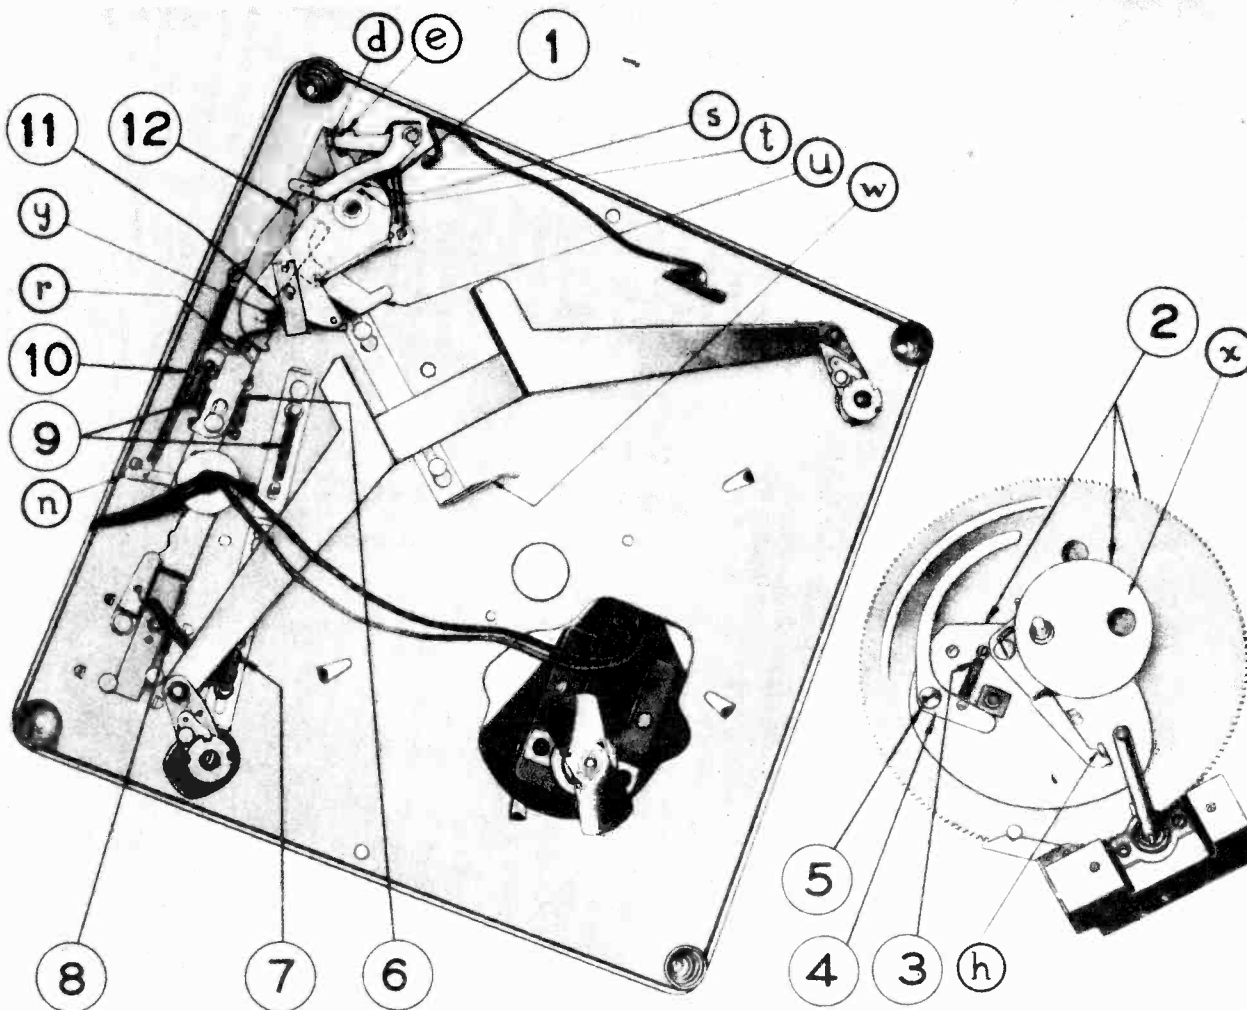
FIGURE IV - BOTTOM VIEW OF RECORD CHANGER,
